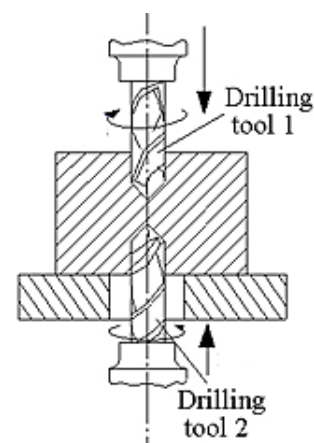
Drilling scheme in which two coaxial drilling tools are used in order to obtain a pierced hole (after [9])
